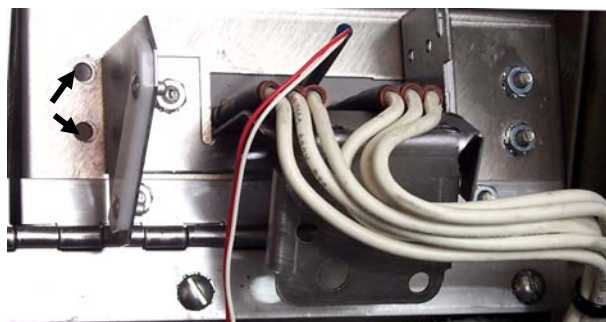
The new element support bracket includes the spring slide hardware. Remove and discard the old slide bracket. Reinstall the screws and nuts to fill the holes in the tilt plate on units with a shroud formed on the tilt plate. See arrows above. The holes are used to mount a shroud on older units.
